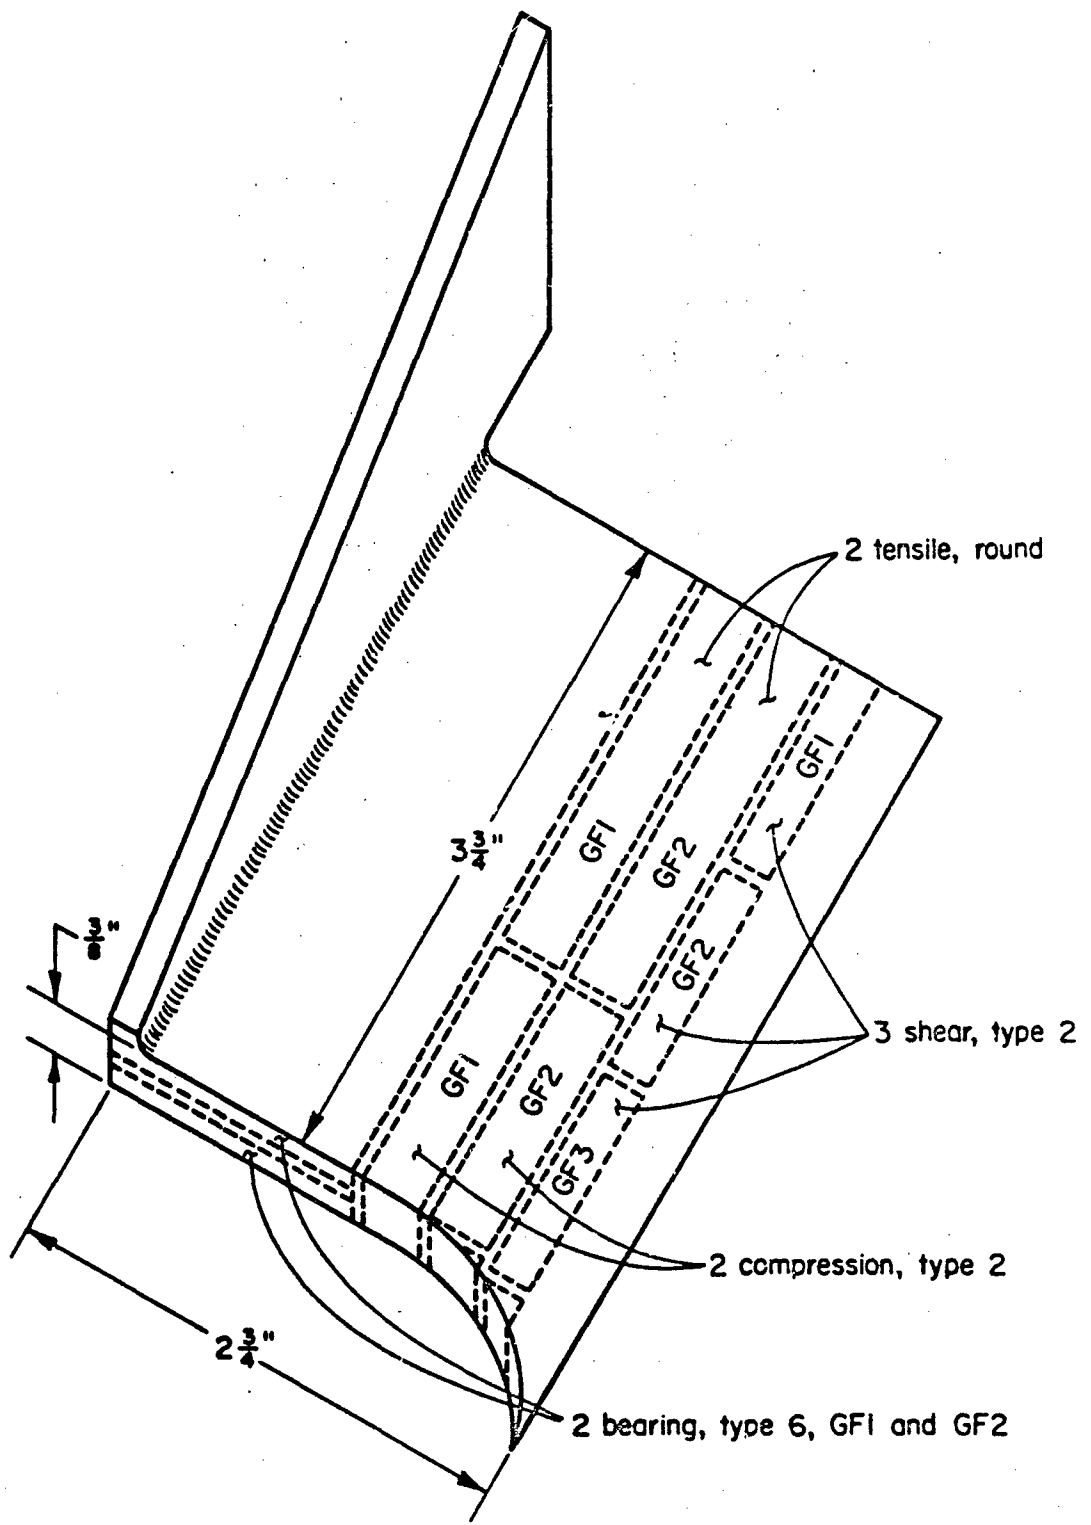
LOCATION OF TEST SPECIMENS FOR CASTING GF
